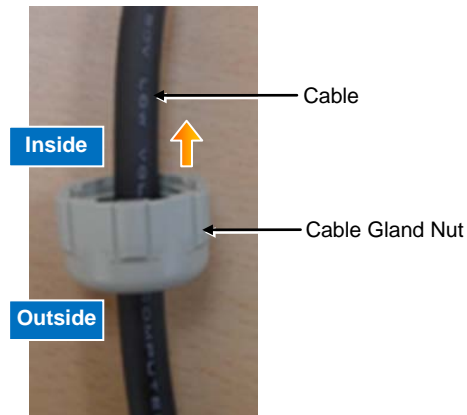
Cable Gland Assembly and Cable Installation Procedure (1)
